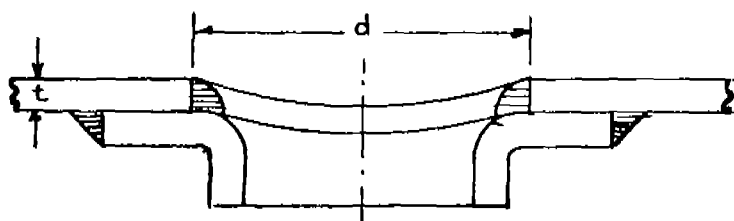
ELLIPTICAL MANHOLE FLANGED FRAME WELDED TO SHELL.
